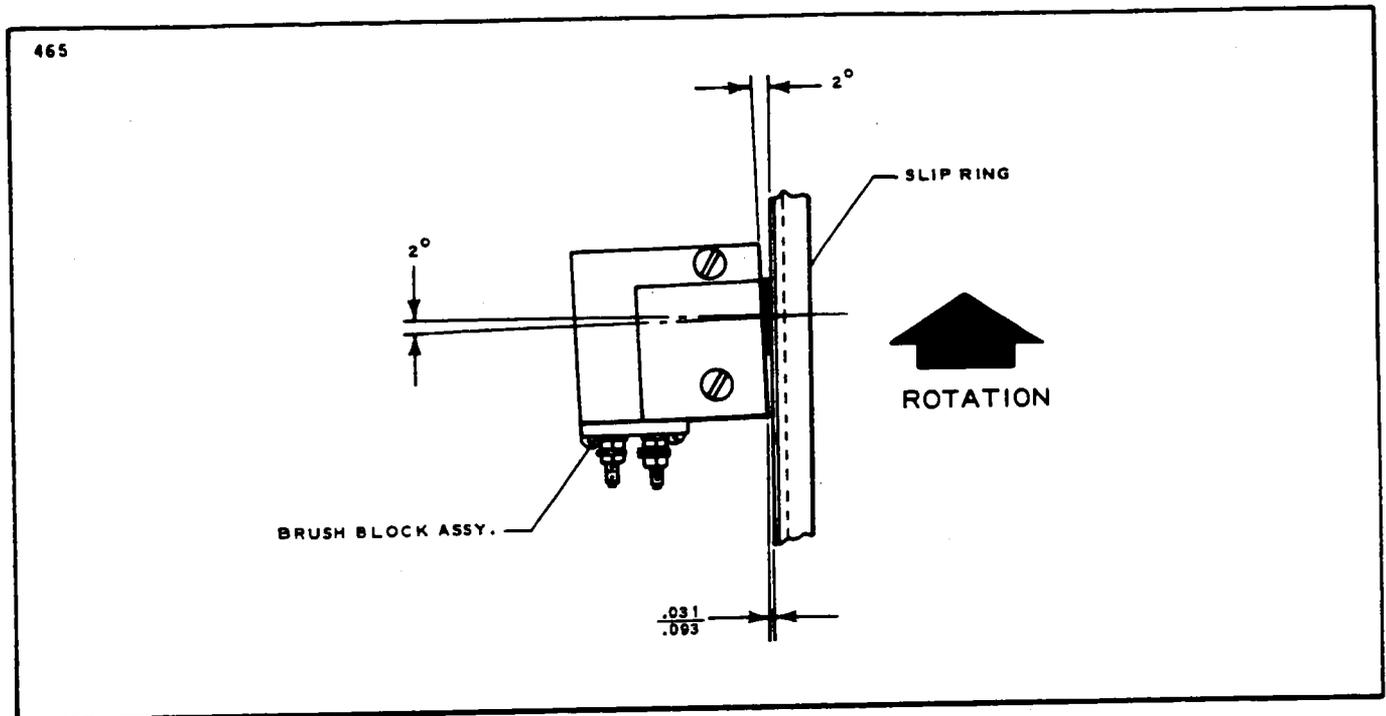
Angle of Contact - Brushes to Slip Rings
